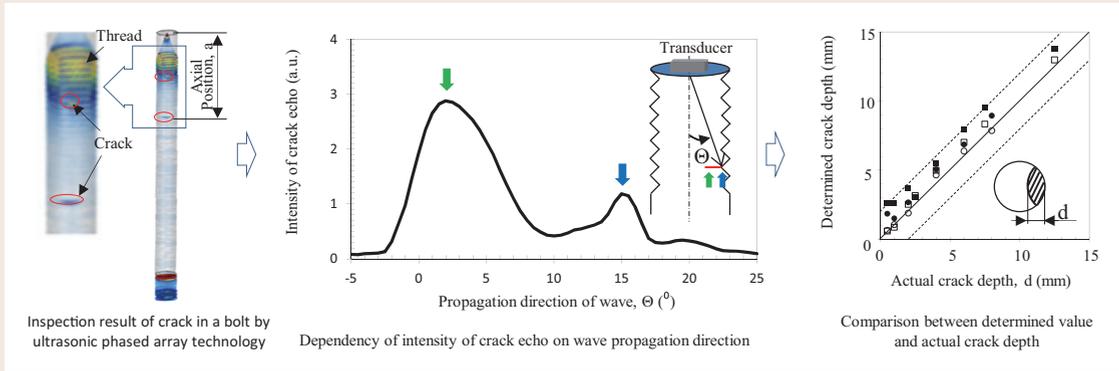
Inspection and sizing method of cracks for embedded foundation bolts
